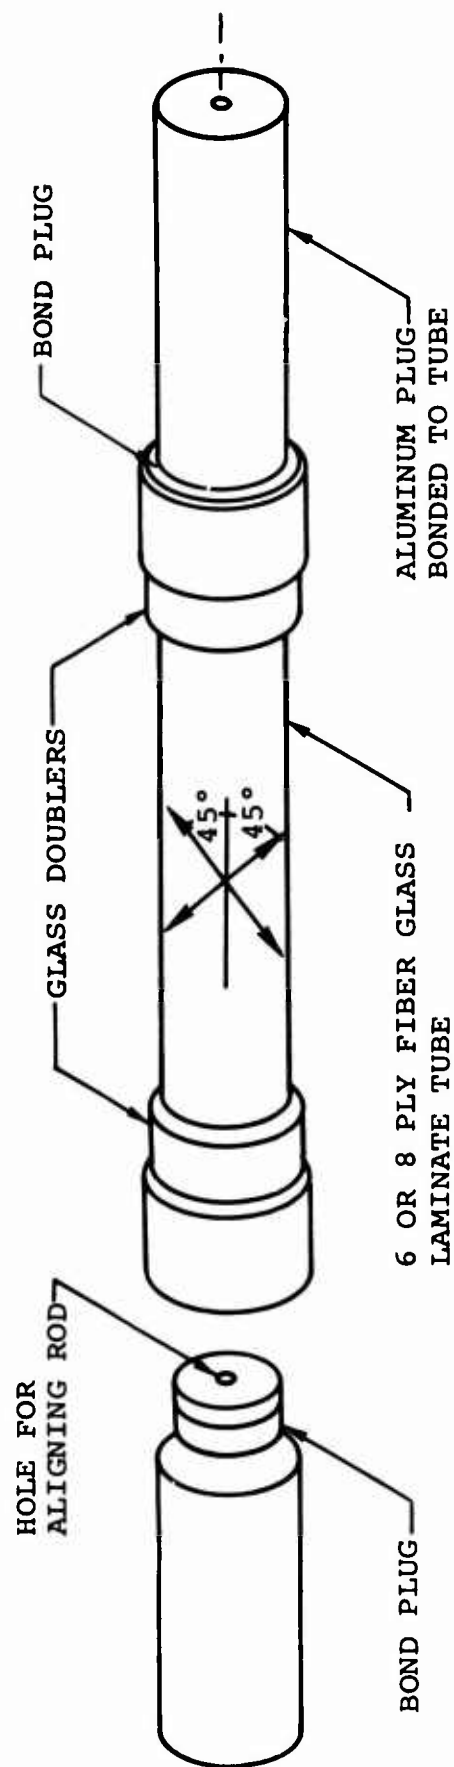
Fiber Glass Torsion Tube Specimen with Aluminum Plug-Grips.
